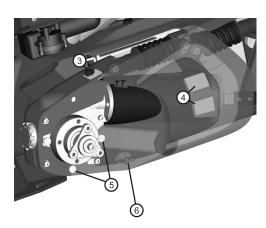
The drive motor cover is assembled with a knob (3) on the top and a dual lock (4) on the side and a fixing point (5) at the bottom.
